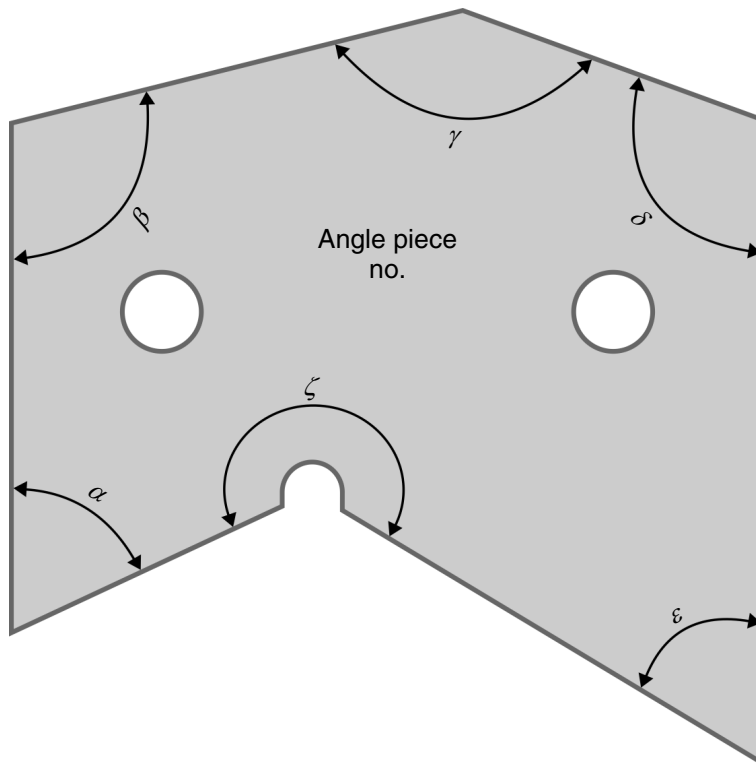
Dimension drawing of angle pieces, scale 1 : 1
